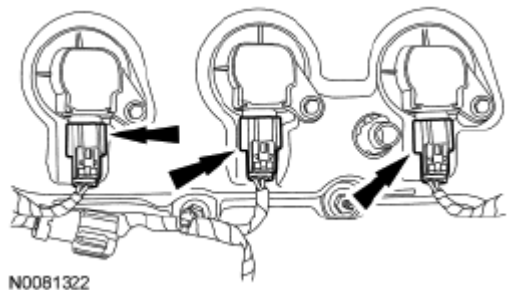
Locating RH Coil-On-Plug Electrical Connectors
